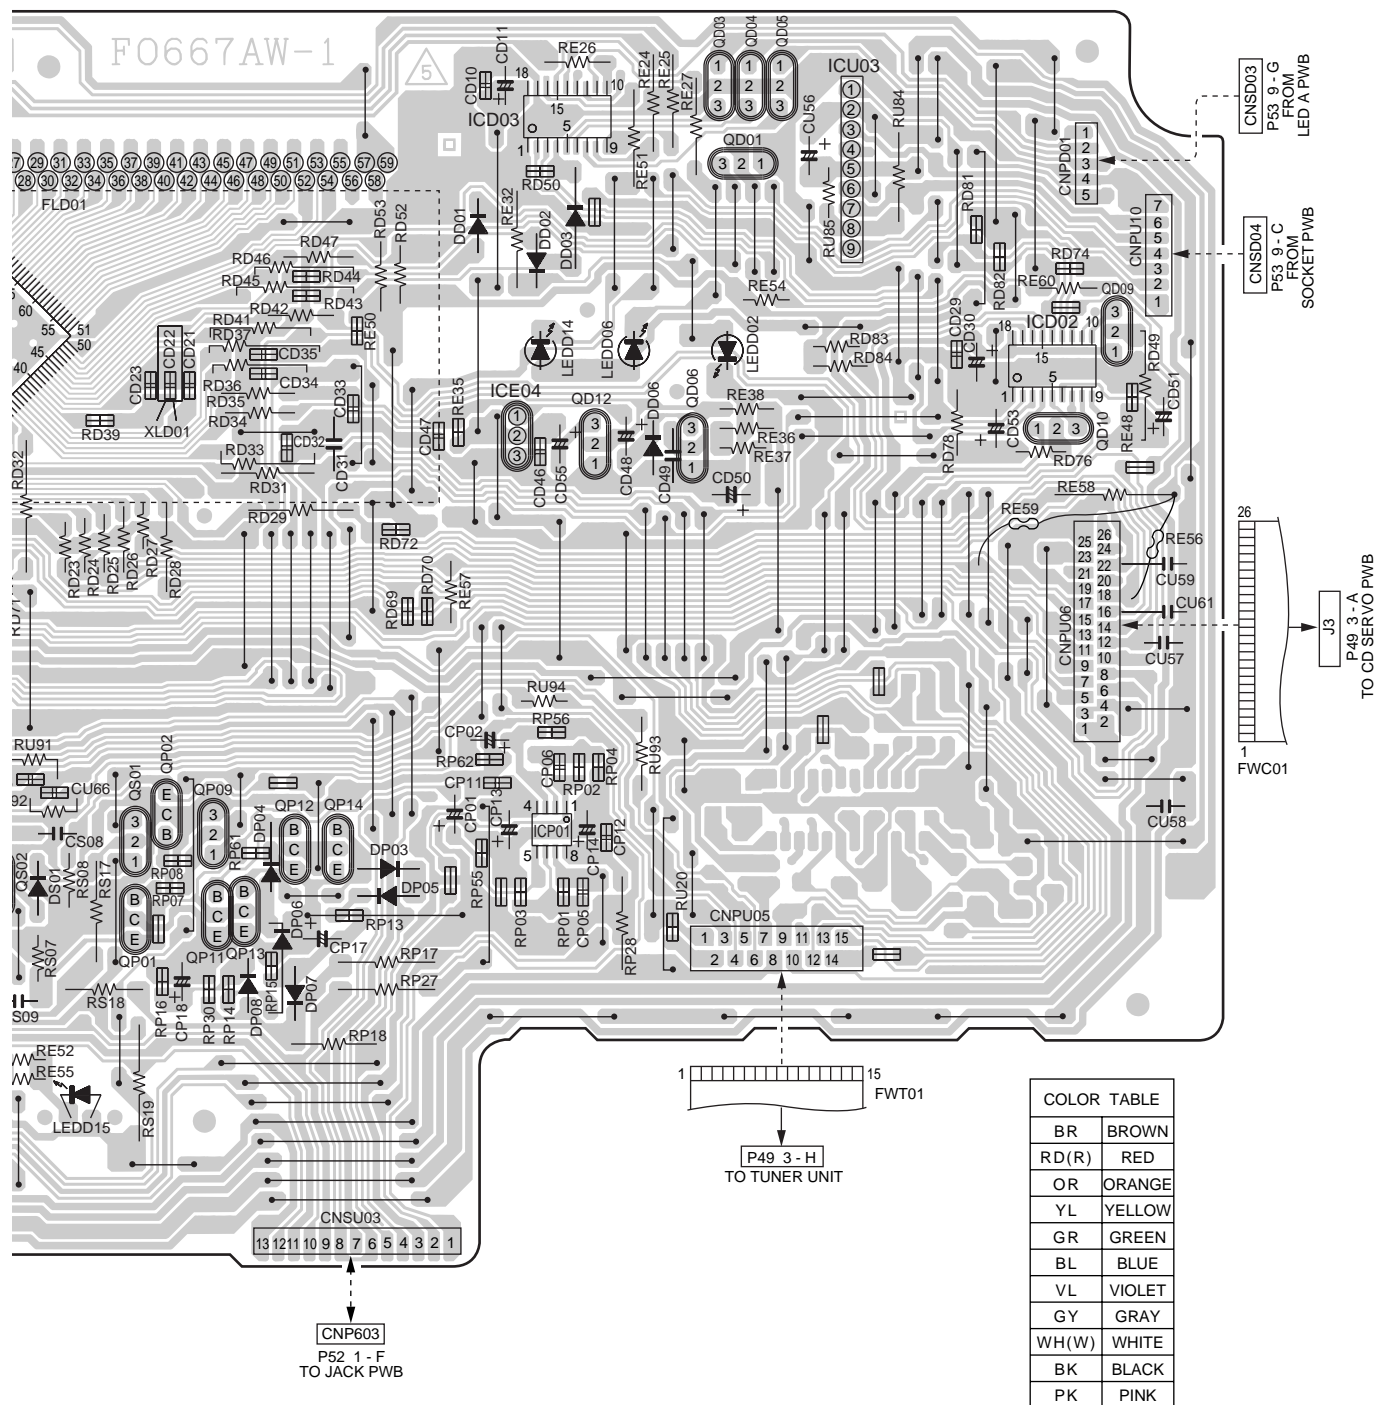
WIRING SIDE OF P.W.BOARD (3/11)
